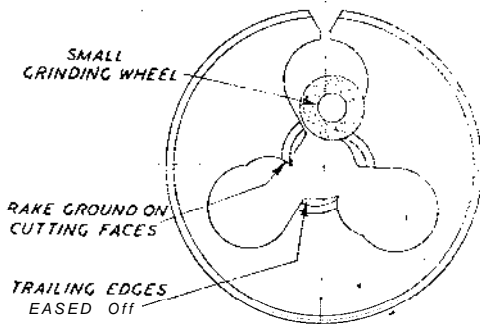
Showing how cutting faces of die may be ground to produce "top rake" by means of a tiny rotary grinding wheel. (Rake exaggerated.)
